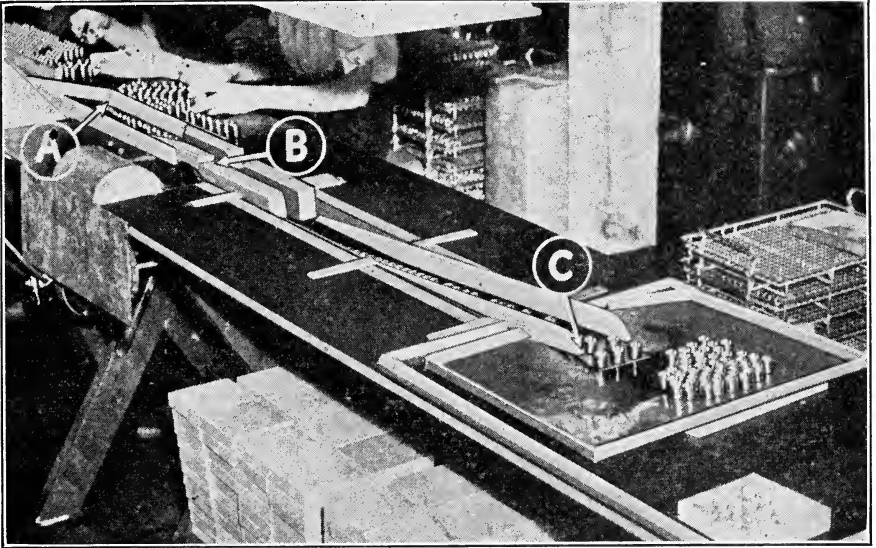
This is the end of a line where parts are packed for shipping. Inspection is completed at point *A*. At point *B*, the parts are released to a second conveyor which runs through a container of rust-proof oil. The parts pass through the oil and up to point *C*, where they wait on the table for packing. Excess oil drains from the parts while they are moving up the incline. (From *The Iron Age*.)
